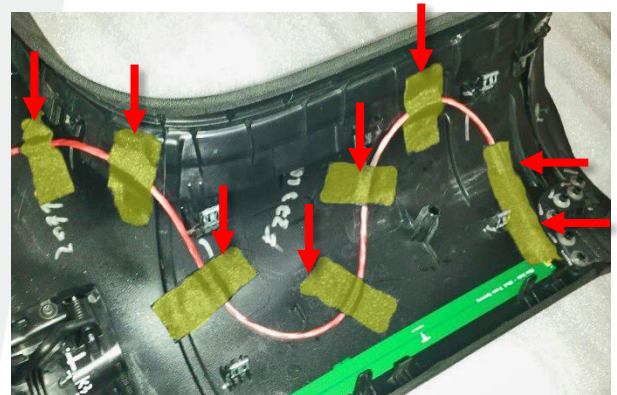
(Rear corner, RH rear upper door trim panel; tape strips highlighted)
